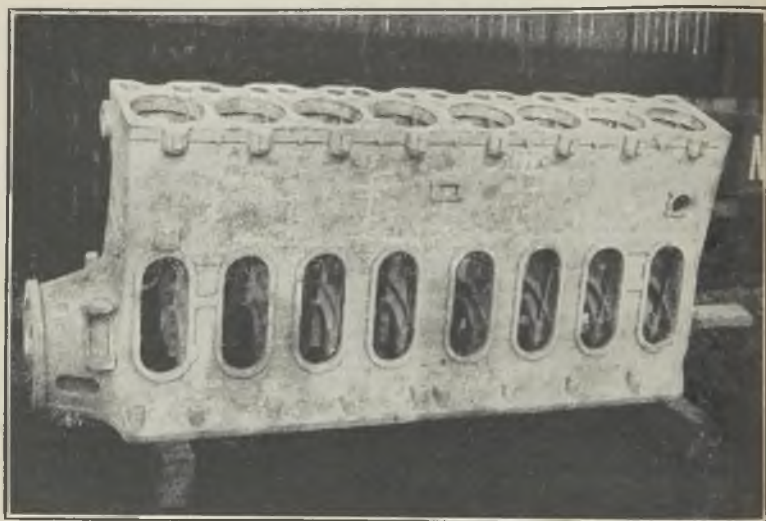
EIGHT-CYLINDER CRANKCASE CASTING.
